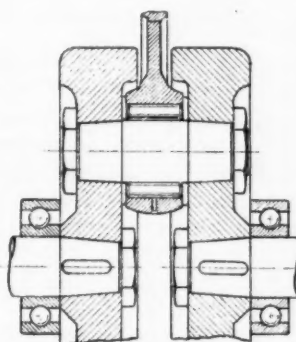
Cageless roller bearing (British Triumph, Garelli)
